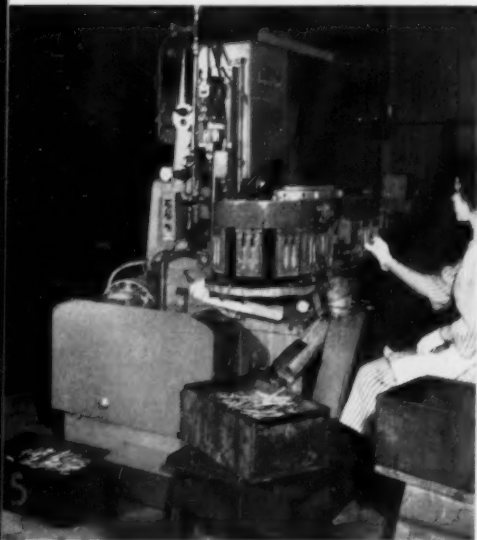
This specially designed Engelberg-Huller wet-dry grinder is particularly adapted for the automatic production grinding of stamped knife handles to fine tolerances.
